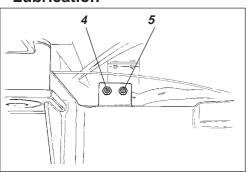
Steering cylinder, right side 4. Lubricating nipple, rear right steering cylinder mount (x1)
